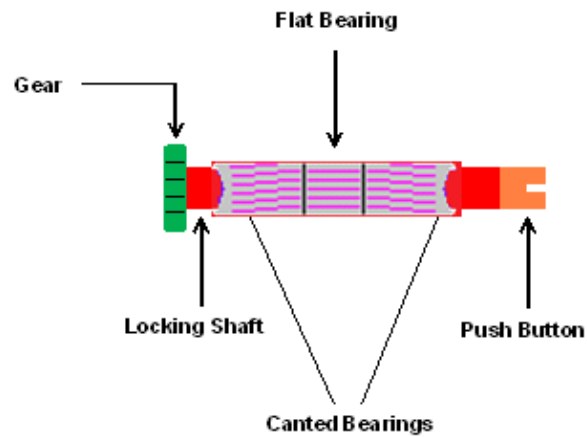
Gear mechanism, roller bearings and adjacent bushings.
